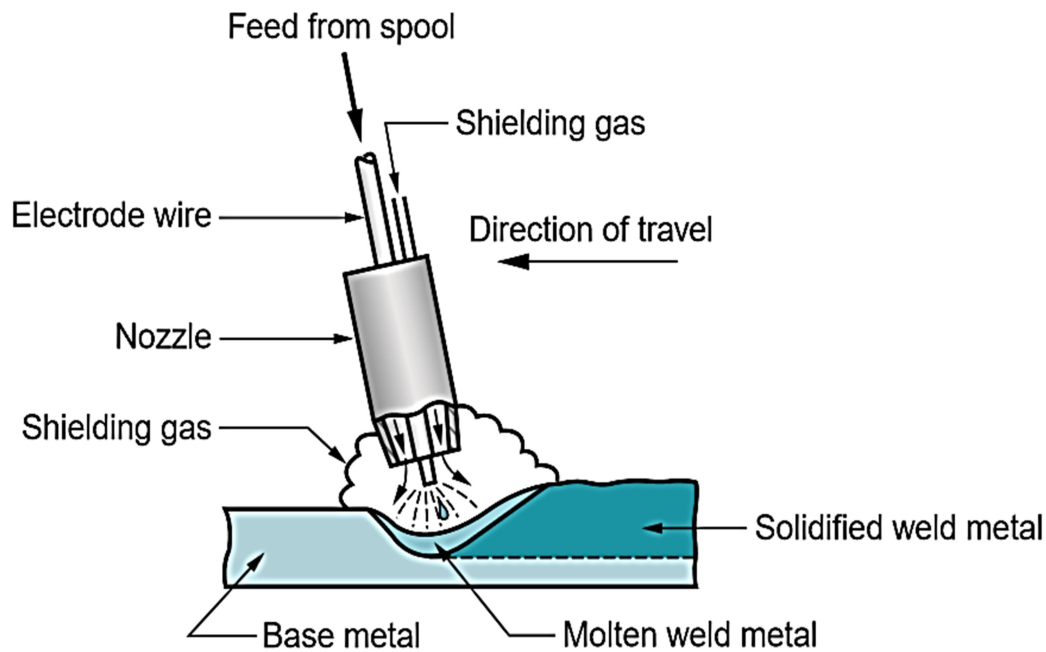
Gas metal arc welding (GMAW).
